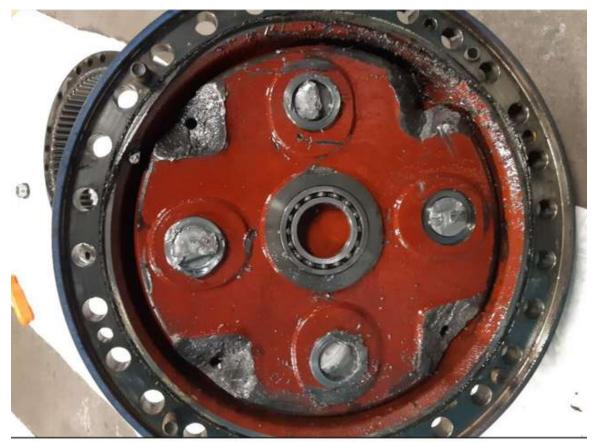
Gearbox Stage 3, planetary gear carriage, fractured gear posts and carrier plate, [Lab report].
